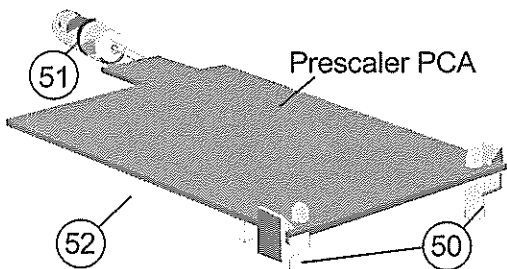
Prescaler assembly (Only 164T and 164H)
